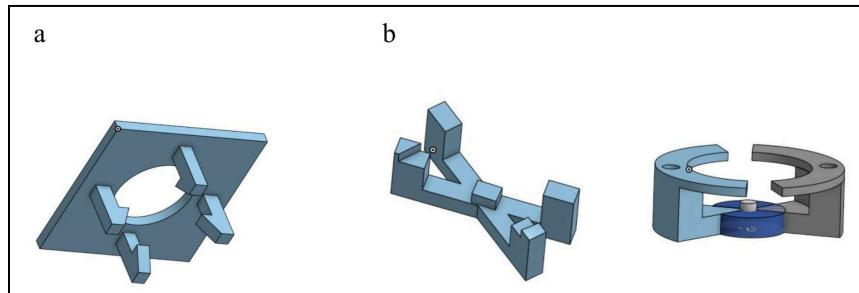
a) The snap fit mount design consisted of four hooks encircling the button hole. b) On the left, the X-shaped basket mount has a small ledge in the middle to support the bottom of the button box. On the right, parts of the basket mount have been filled in and extended to provide more surface area contact with the clicker shell. Screw holes have also been added.
